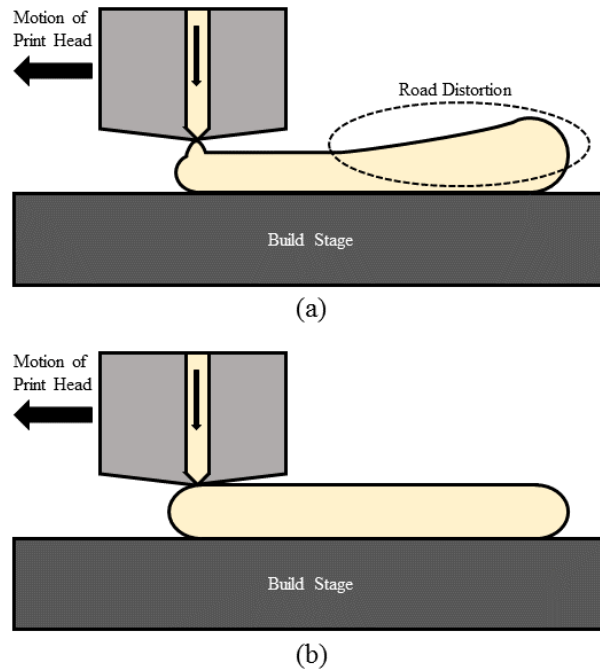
Interaction of extrusion print head with the deposited road. (a) The road shape is distorted when the print head is too far above the deposited road. (b) When the print head is in contact with the deposited road it ensures a flat top road surface.²⁴
